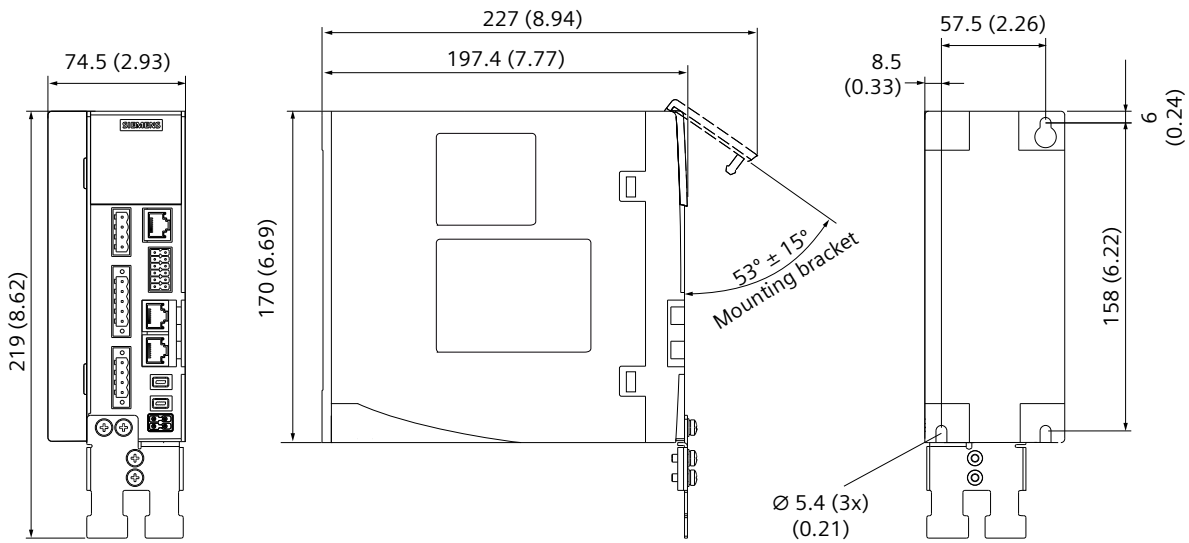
Dimension drawing SINAMICS S210 FSC, 1 AC, dimensions in mm (inch)
